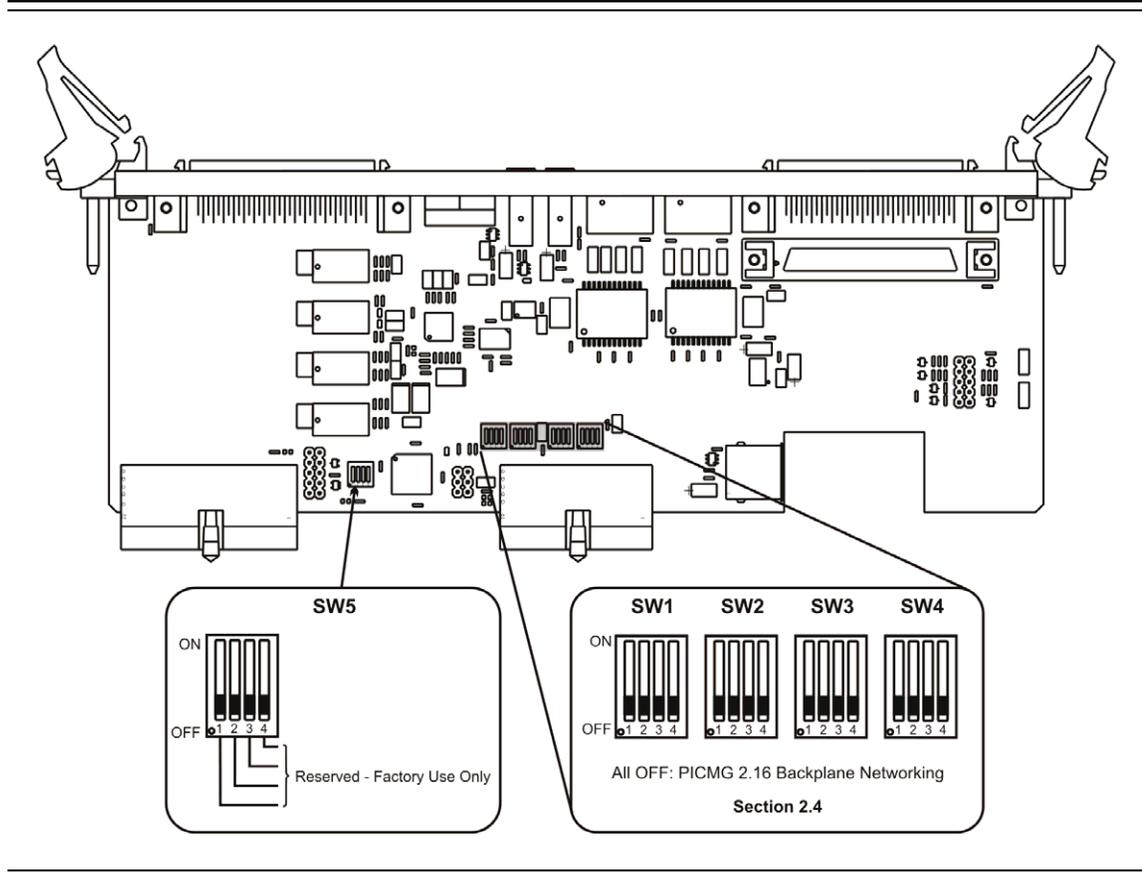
Factory Switch Settings (Rev B and Rev C boards)
